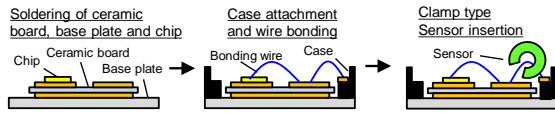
Assumed procedure to attach the PCB sensor in power modules.
